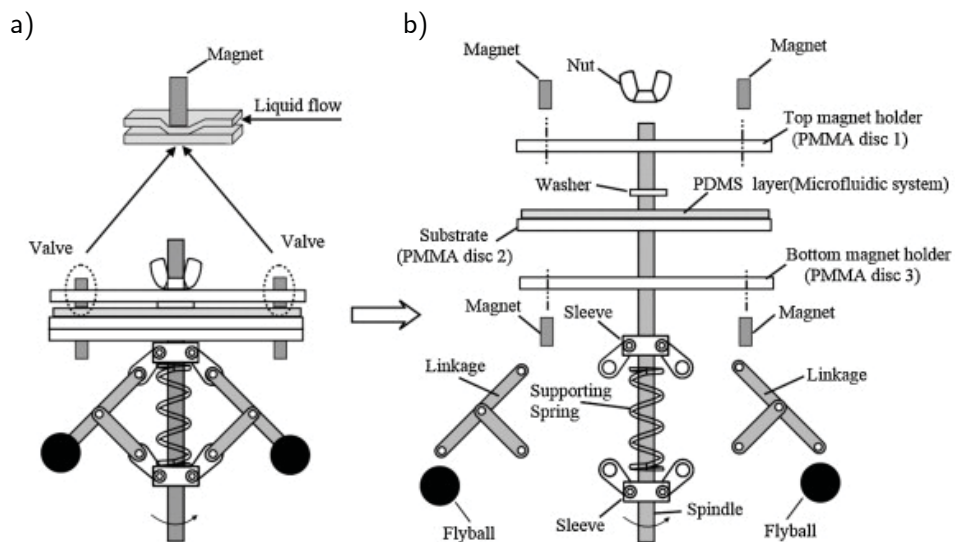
Magnetically-actuated valve based on the use of a flyball governor. a) Schematic diagram of the valve system. b) Exploded view of the assembly. Adapted from reference [43].
